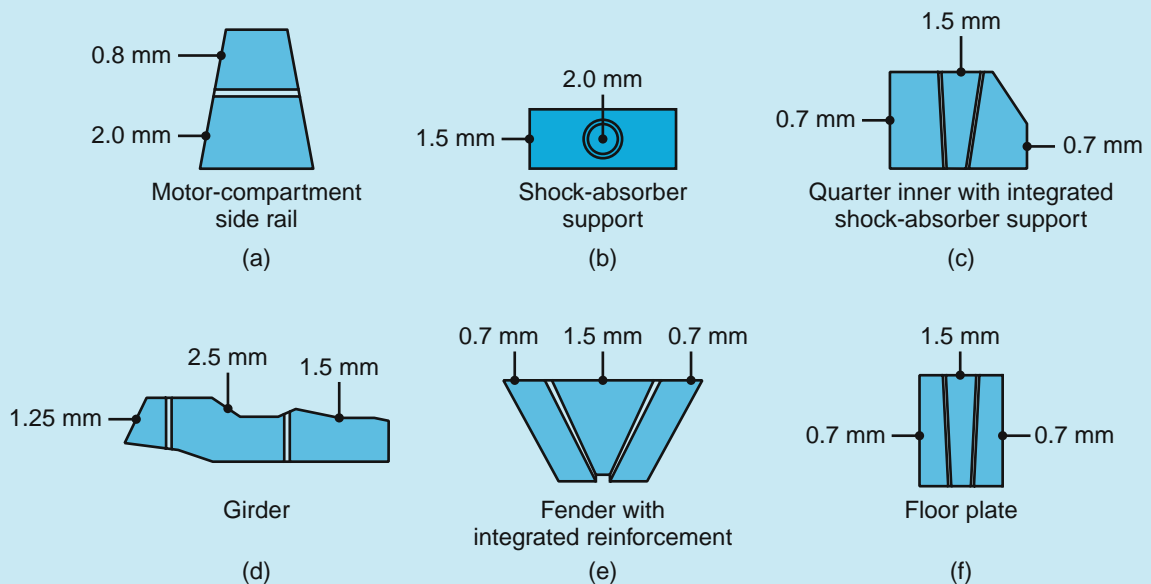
Examples of laser butt-welded and stamped automotive-body components. *Source:* After M. Geiger and T. Nakagawa.
